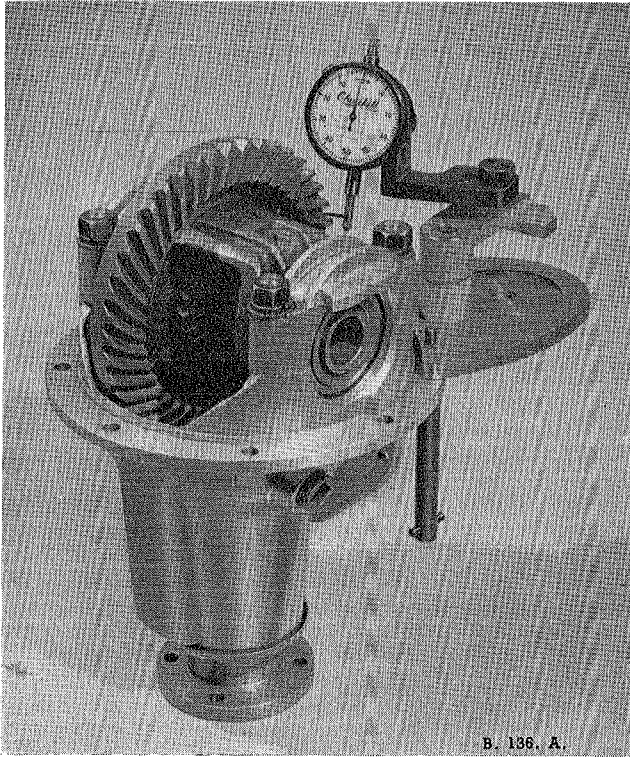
Checking crown wheel to pinion backlash (Service Tool No. 18G 191B).
